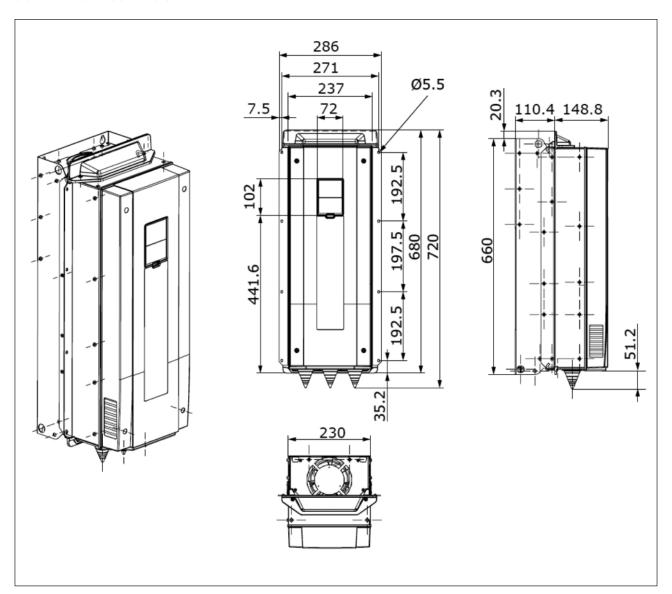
The dimensions of the AC drive, flange mounting, MR7
